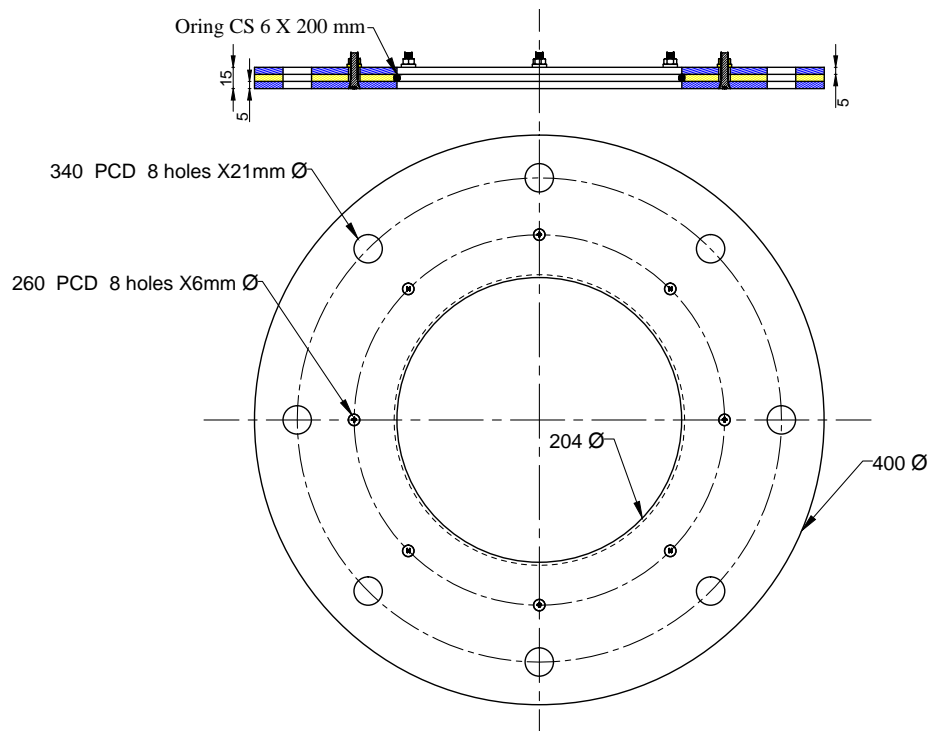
Dimensions of the aluminium sealing flanges to connect to the PVC pipe.
